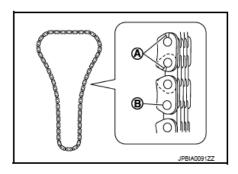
Inspecting Timing Chain For Cracks And Wear Courtesy of NISSAN NORTH AMERICA, INC.
